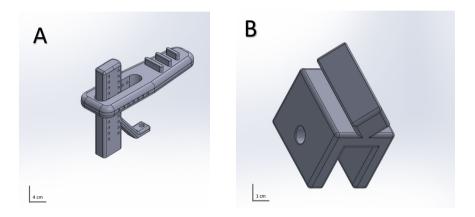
A) CAD model of the 3D printed mouthpiece. B) Design of the 3D printed micromanipulator adapter for Kopf Model 1760
